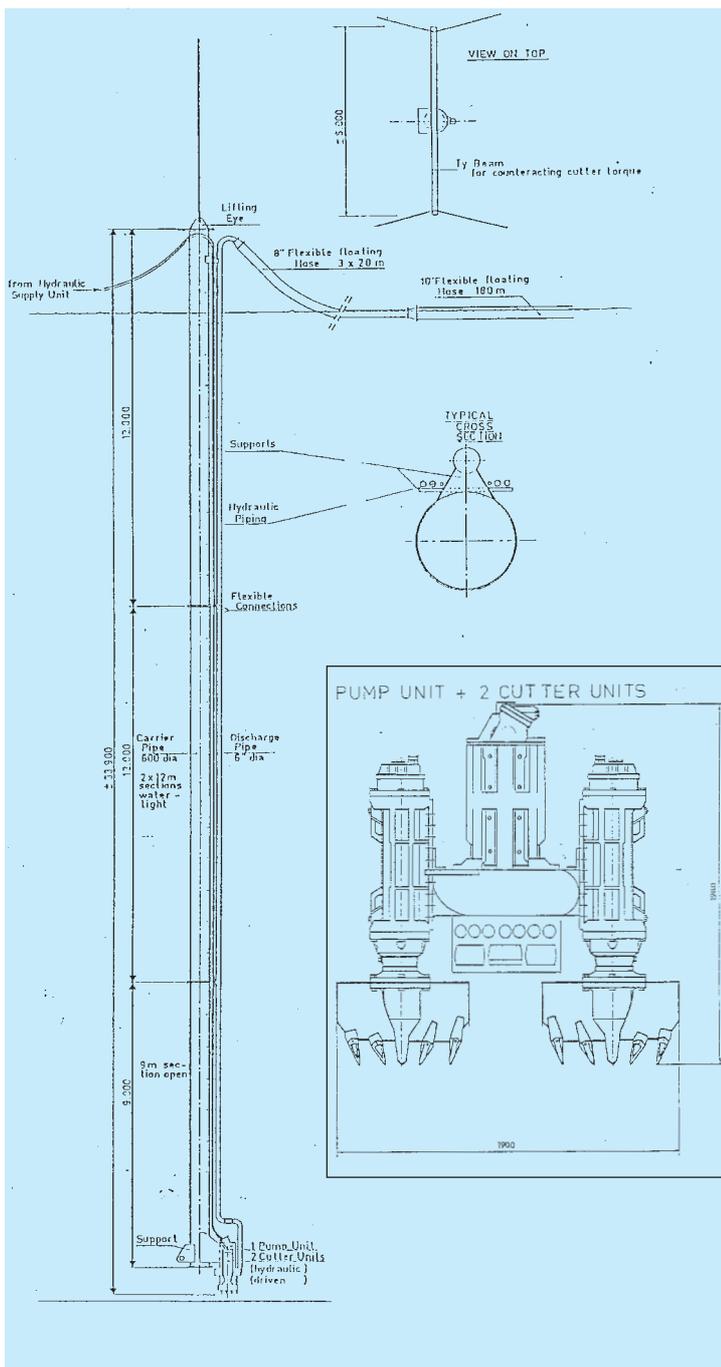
General arrangement of the steel pump; insert: one pump unit and two cutter units, hydraulic driven.
